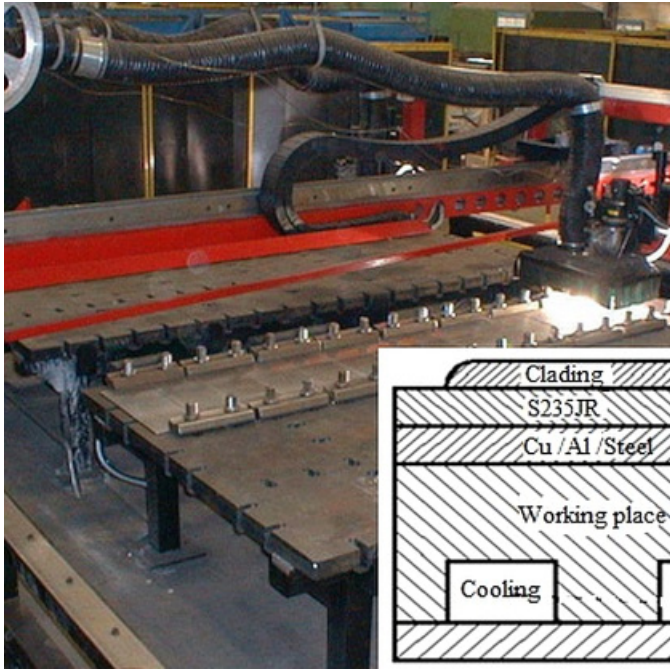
The view position for the automatic welding and schematic view of the work table
